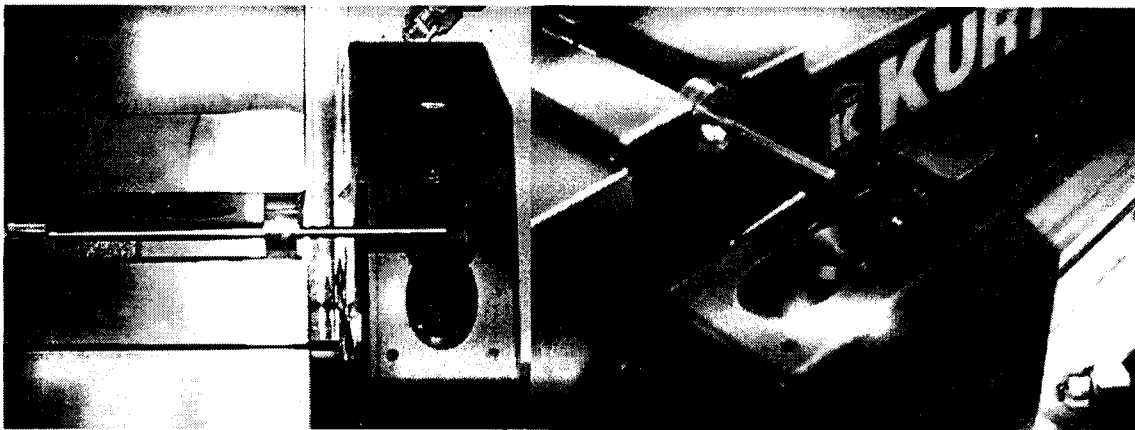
Tool supported with cantilever and point supports machined from aluminium.
